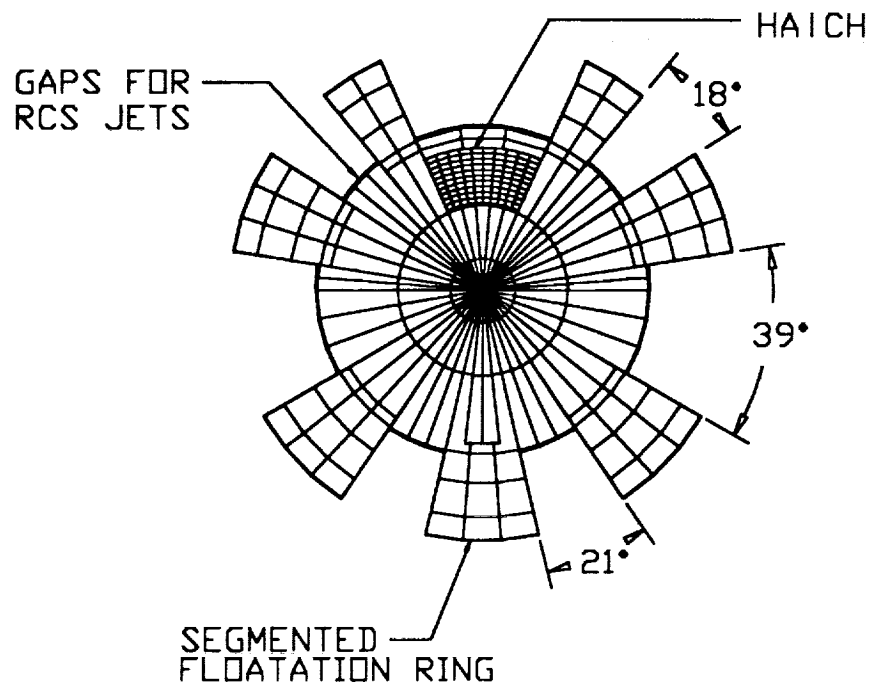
Detail of Segmented Ring and RCS Locations
